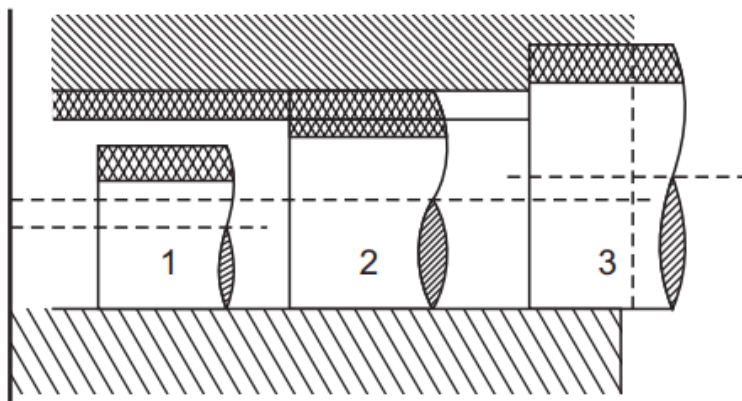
Toleranced dimensioning of assembled parts
